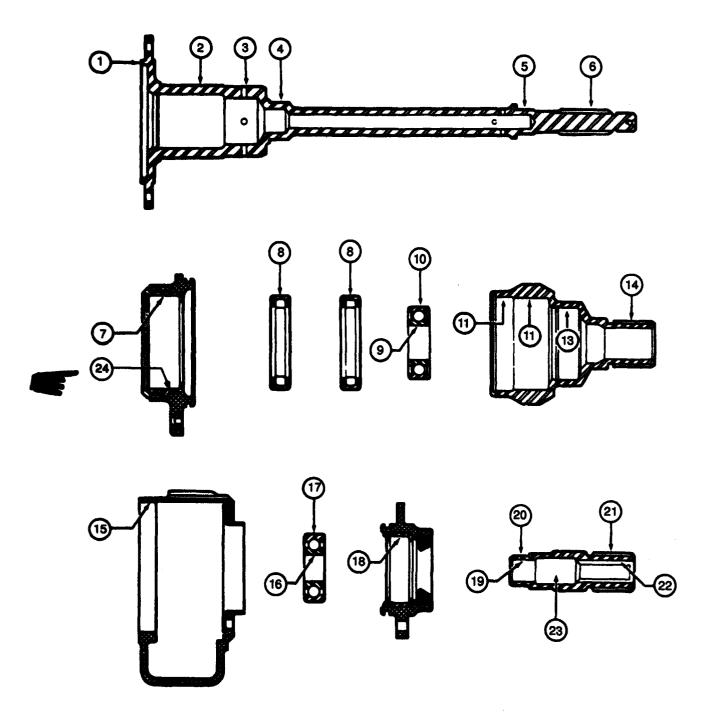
Limit Chart - Freewheeling Assembly (Sheet 1 of 2).
